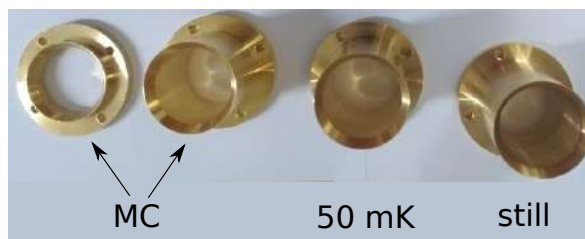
The gold-plated clamping guides for the motorized probe.
